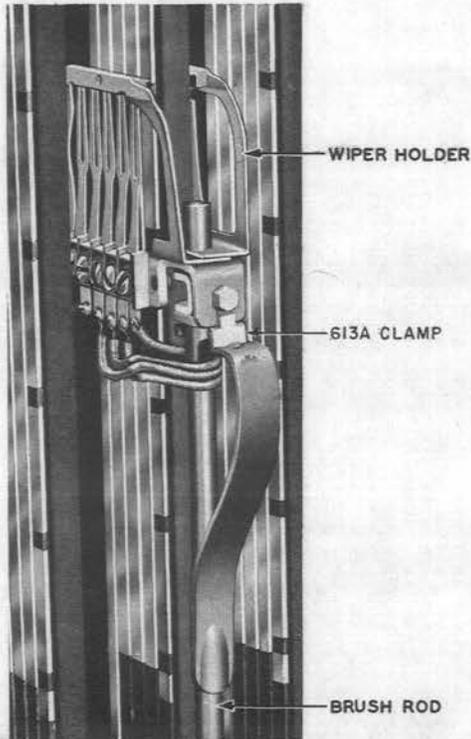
Wiper Holder in Place on Commutator Brush Frame
